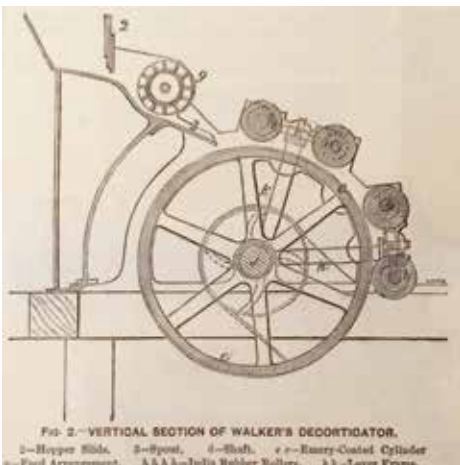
VERTICAL SECTION OF WALKER'S DECORTICATOR.
